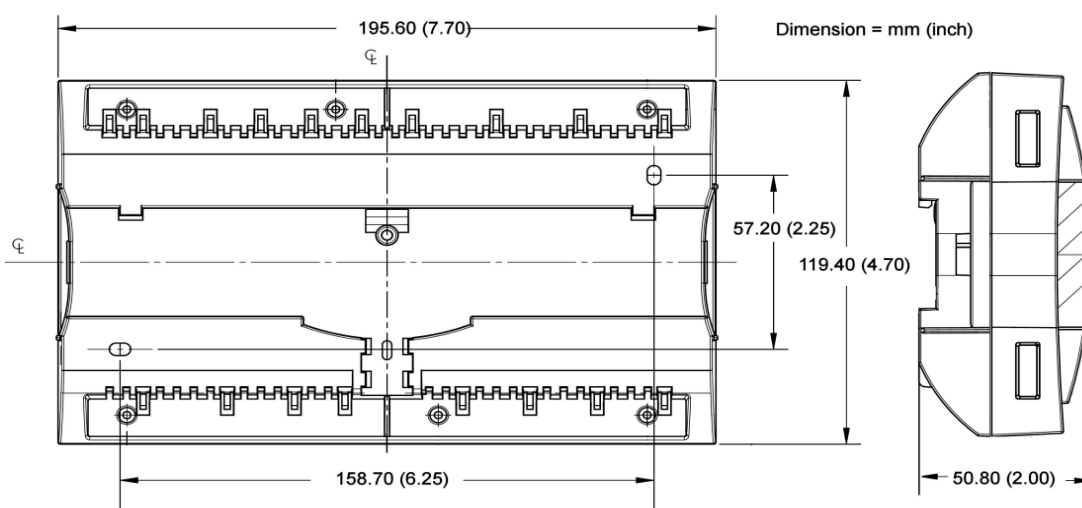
Dimensions - Remote I/O 401 and 520 Controllers
